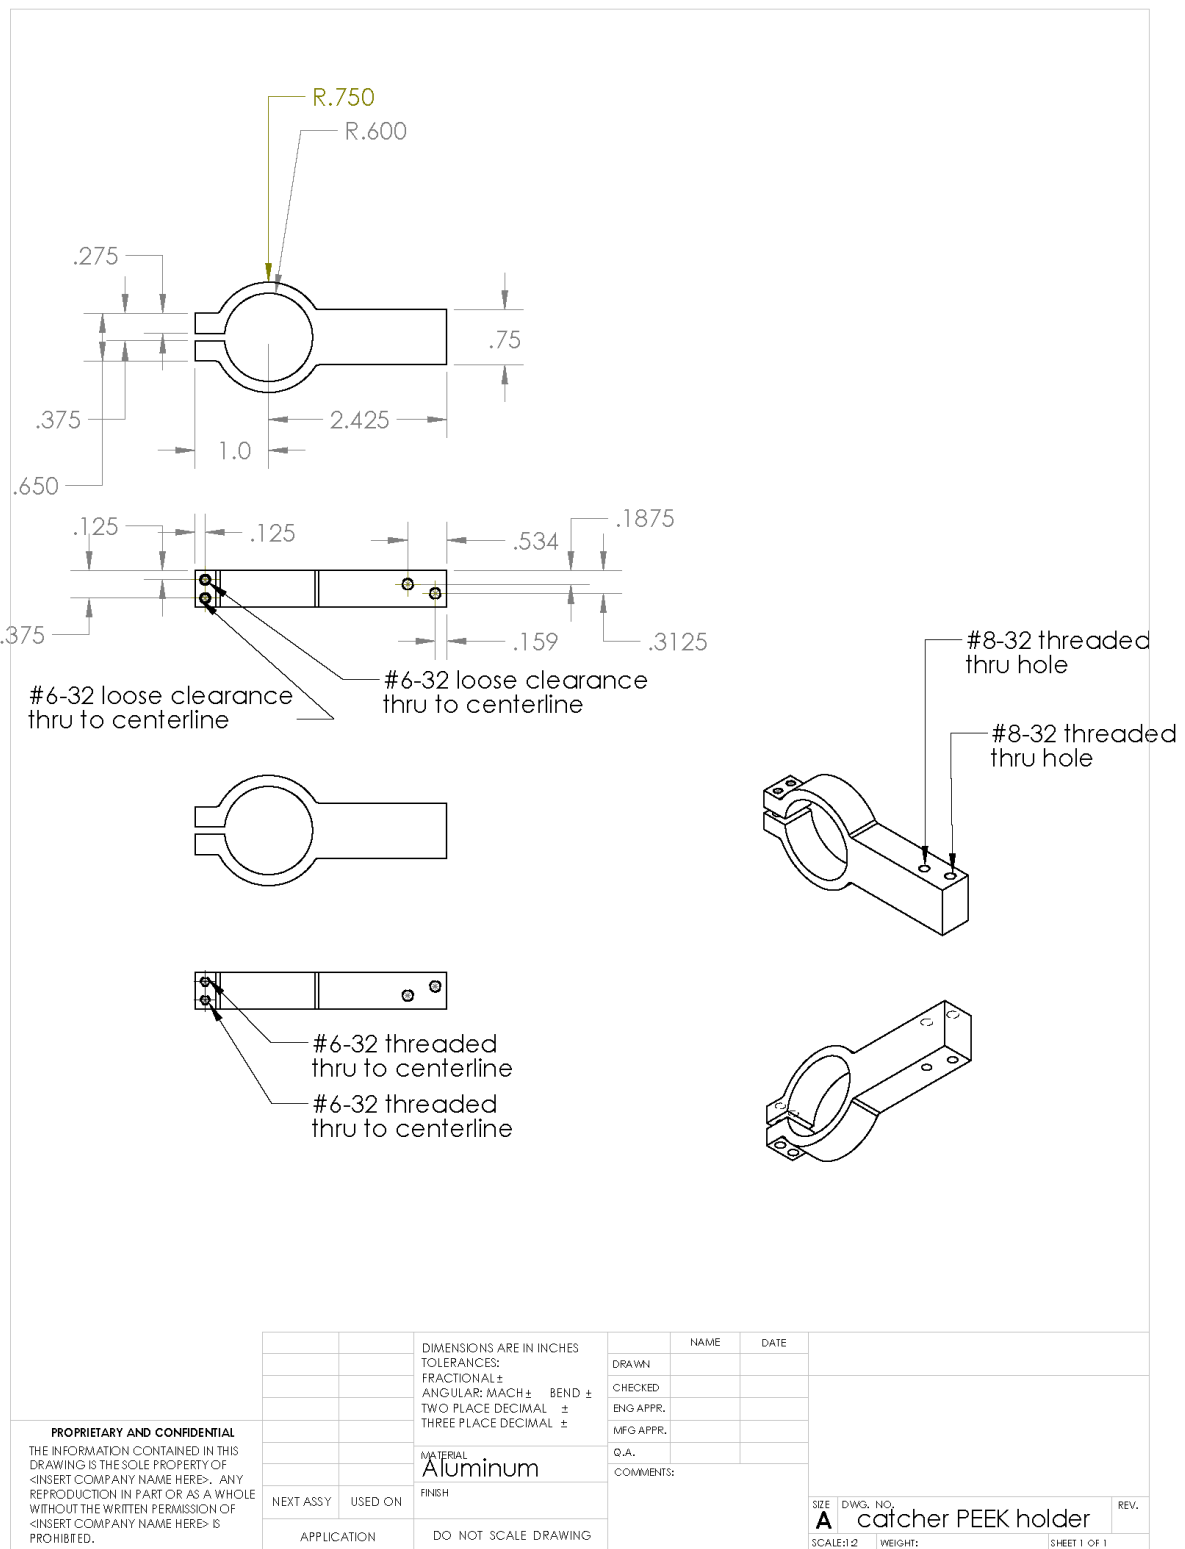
The arm extending from the component shown in Figure B.13 to the catcher assembly.
